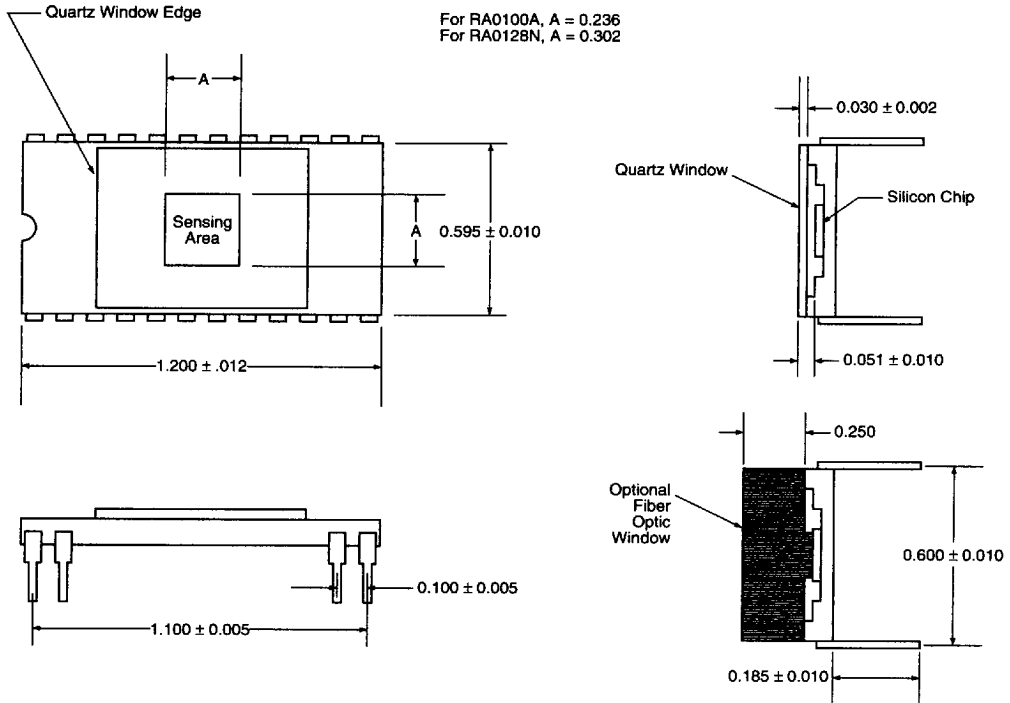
Package Dimensions. Dimensions are in inches except where millimeters (mm) are indicated.
